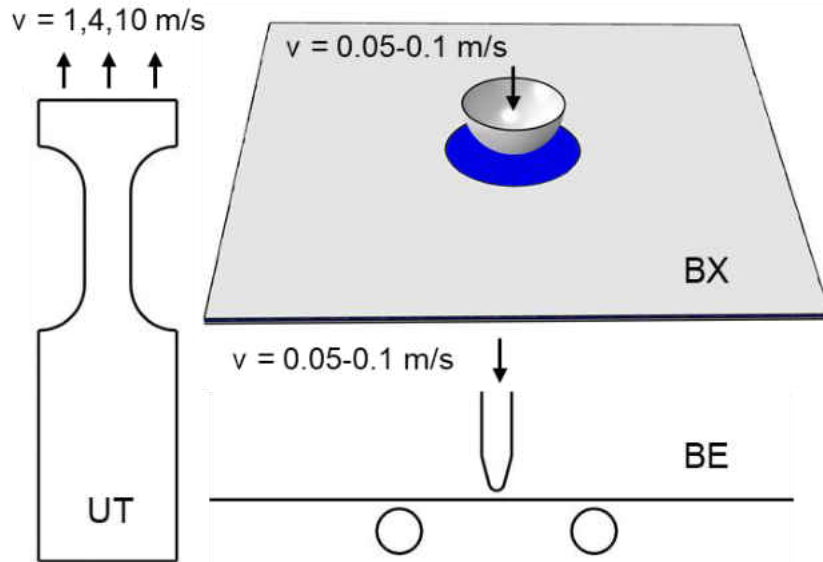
Schematic drawings of specimens tested under high-speed conditions for MP980, DP1180 and PHS1300. (1) UT: uniaxial tension (2) BE: plane strain bending (3) BX: biaxial punch.
